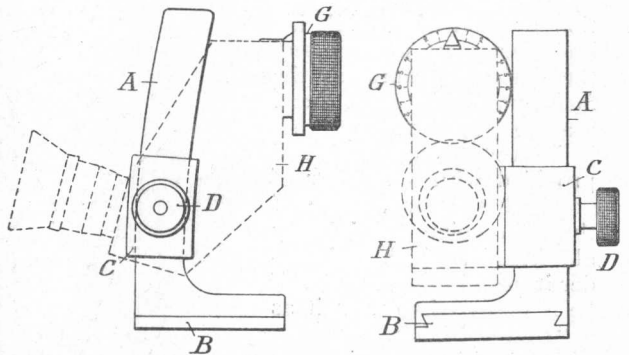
Prism telescope sight on elevating arc with lateral correction to object glass for windage.
